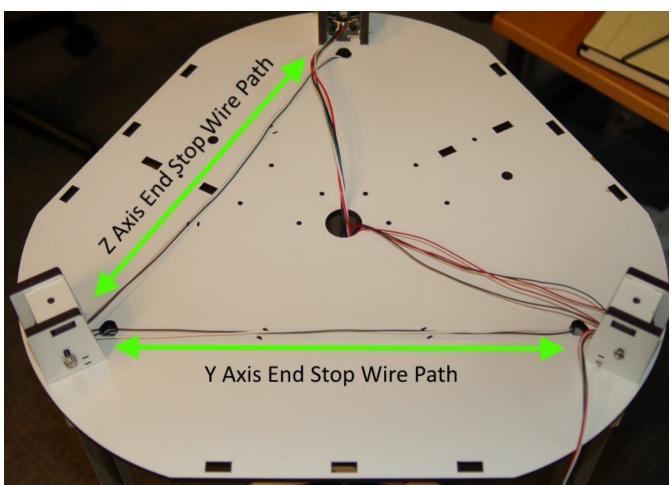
Z and Y axis end stop switch wire paths. [Top plate is flipped in the photo, so the upper wire path will run from the Z axis to the Y axis!]
